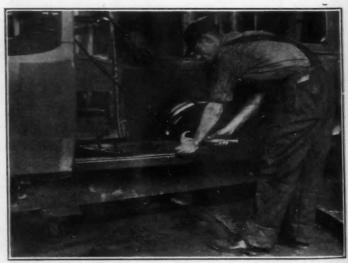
ASSEMBLING OF DOOR-SILL PANEL
